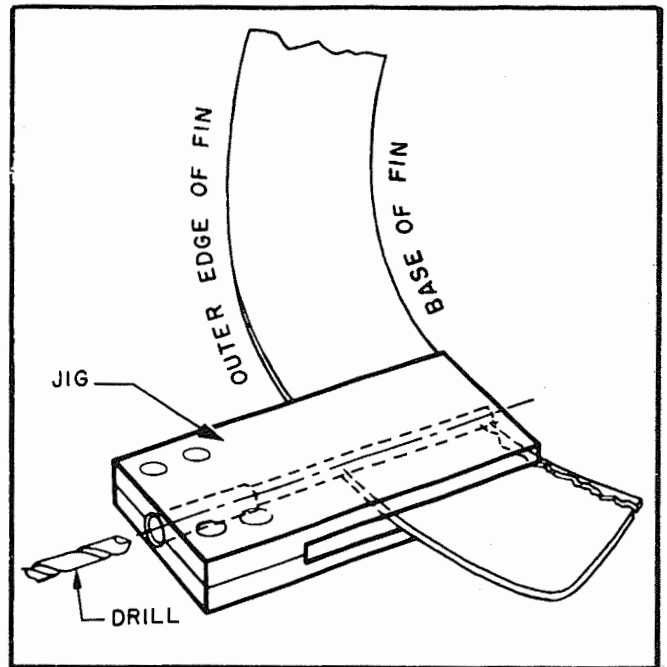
Cylinder Head Fin Profiling Drill and Jig
